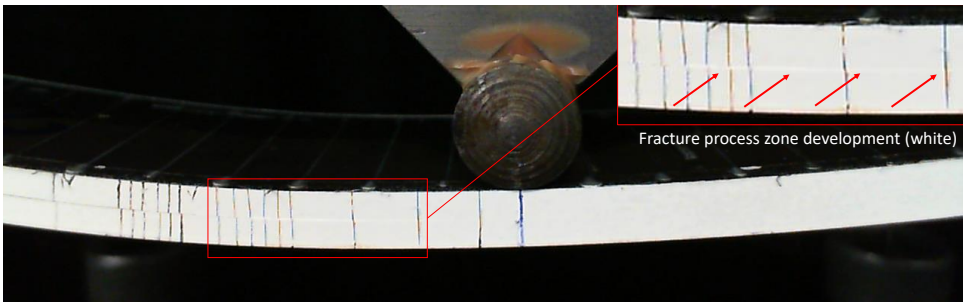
Visually observed fracture process zone during ENF test on full weld specimen.
